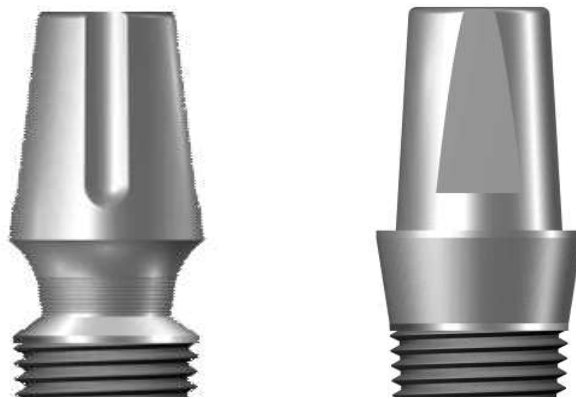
Top abutmentTM(Left) and Esthetic abutmentTM (Right)
